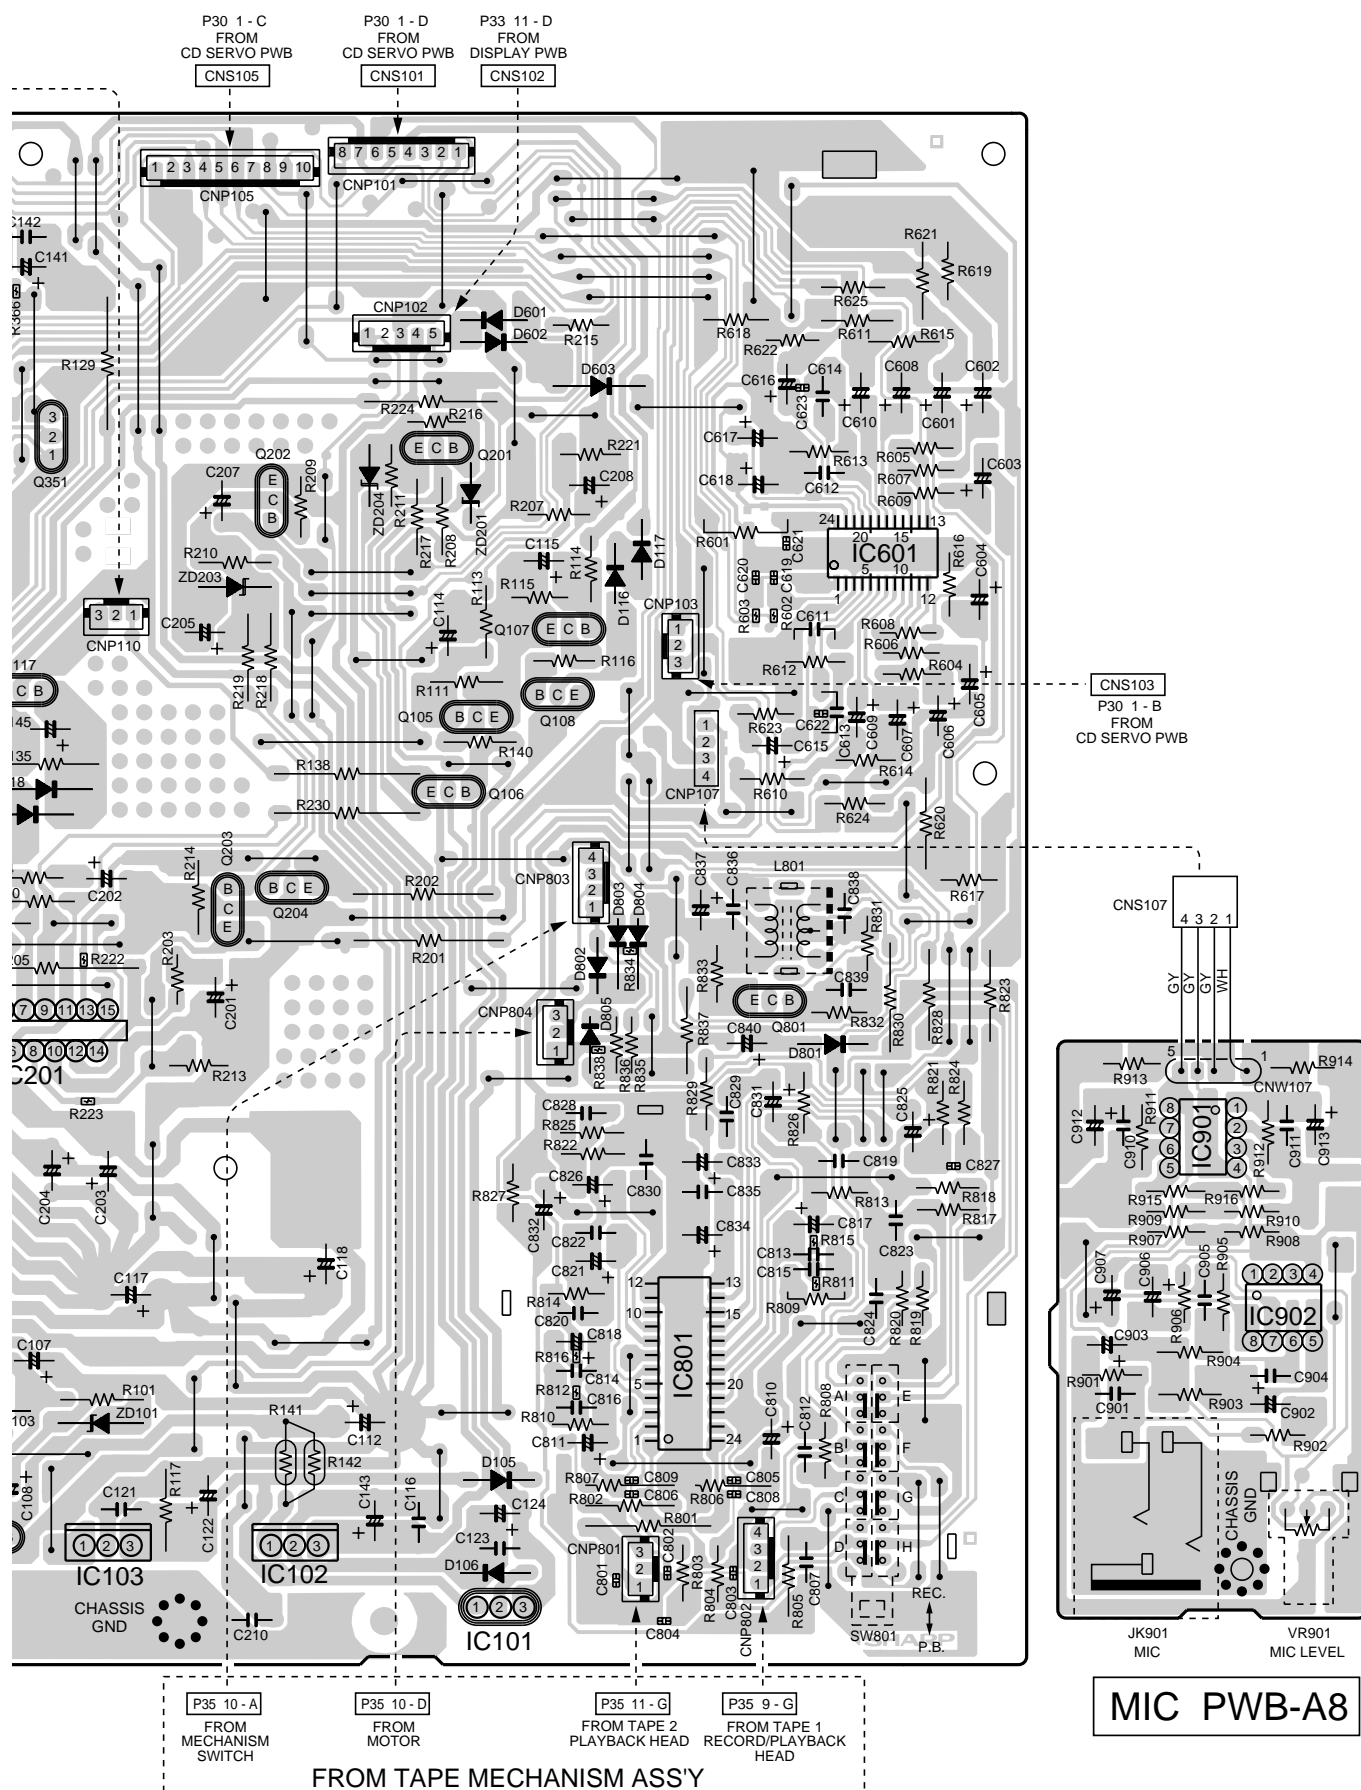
WIRING SIDE OF P.W.BOARD (2/8)
